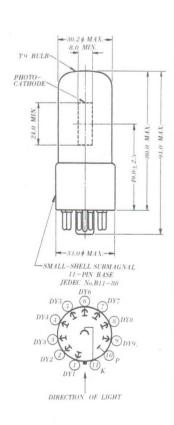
DIMENSIONAL OUTLINES AND BASING DIAGRAMS-DIMENSIONS IN MILLIMETER
